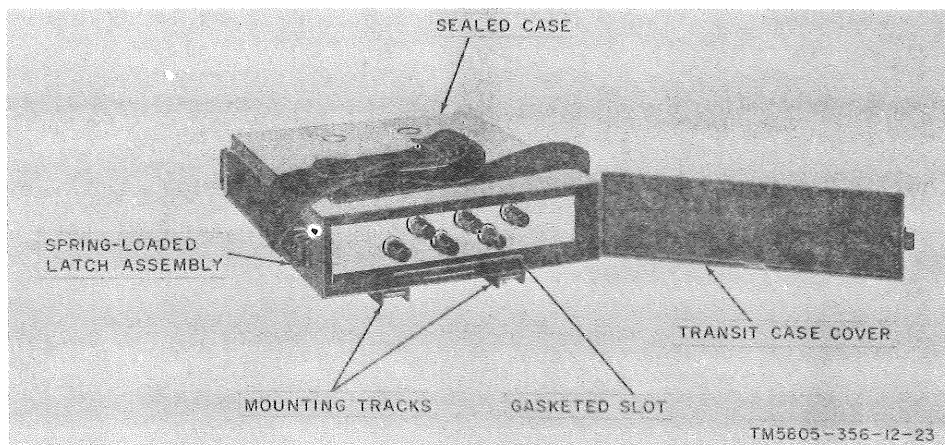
Filter Assembly, Electrical F-316/U, front view of panel.
